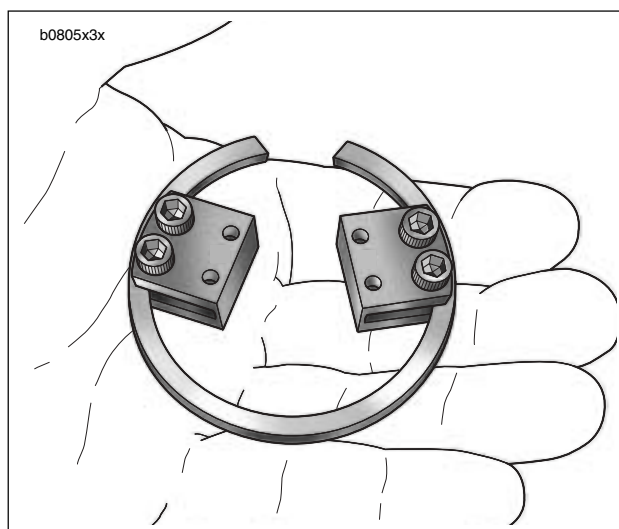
Removing Sprocket Shaft Inner Timken Bearing (Typical)
